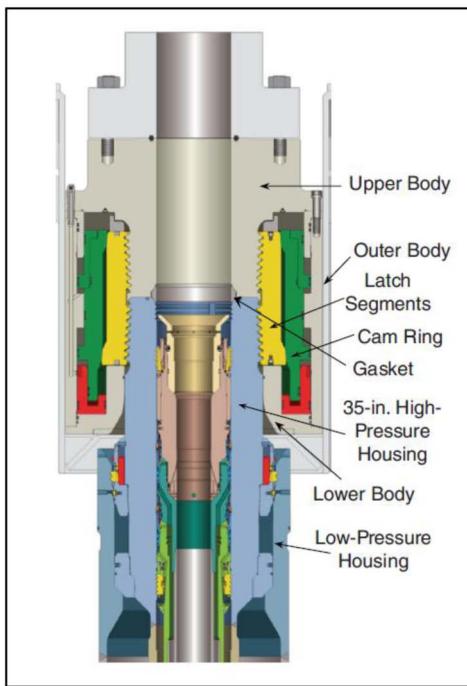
35-in. Mandrel/Wellhead System Design (Kaculi, 2015; Carpenter, 2016)
